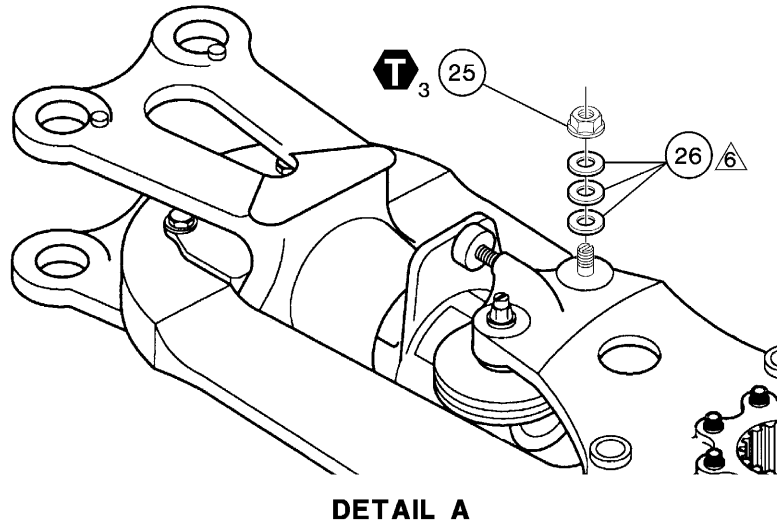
Main Rotor Hub Assembly (Sheet 2)
